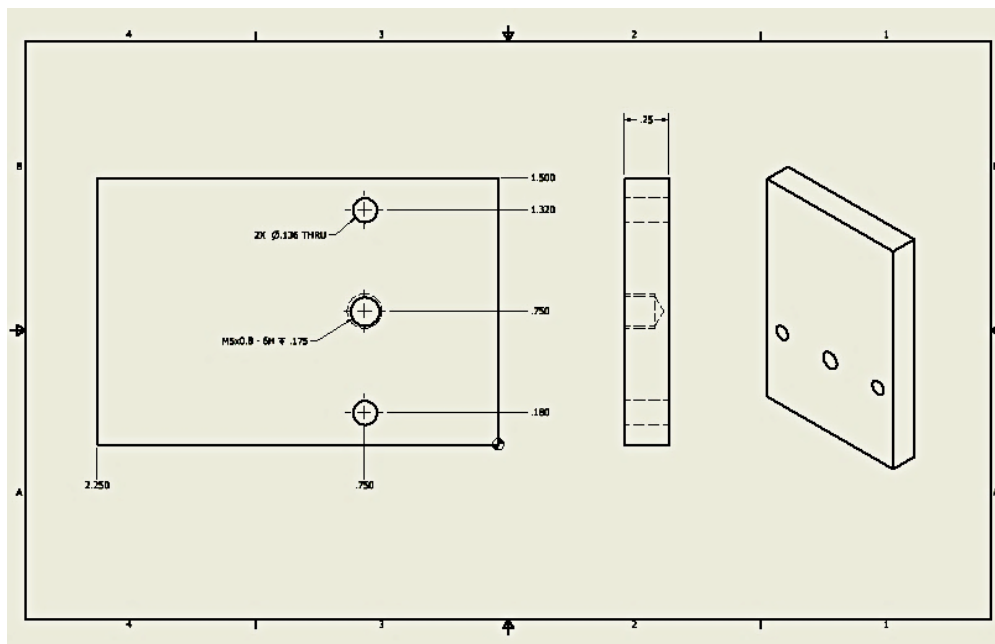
Dimensional drawing of elbow load cell mounting plate
